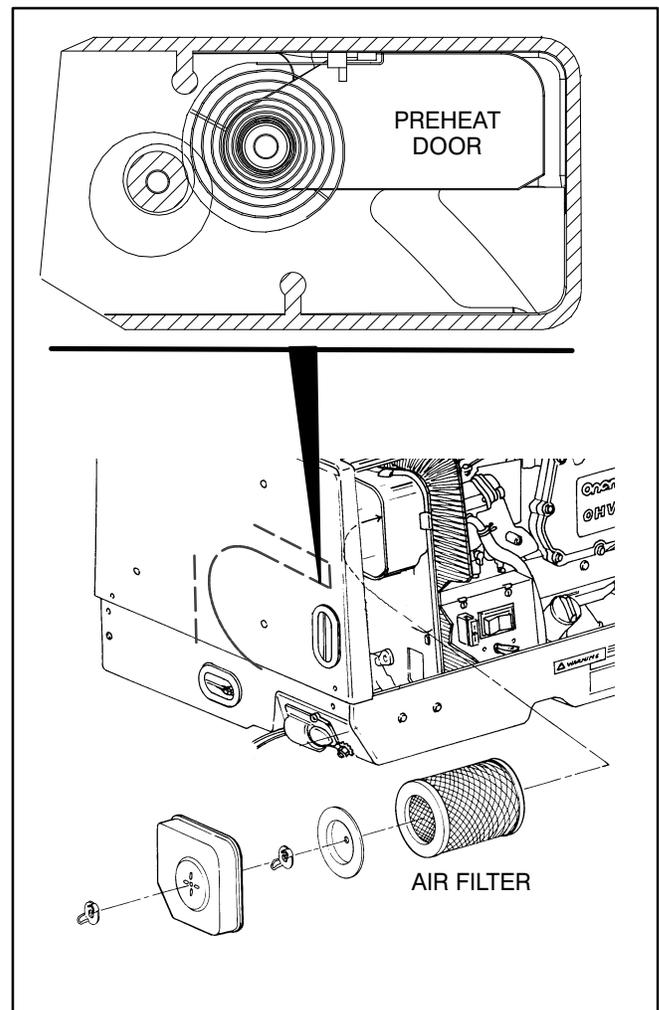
AIR FILTER AND PREHEATER ASSEMBLY
